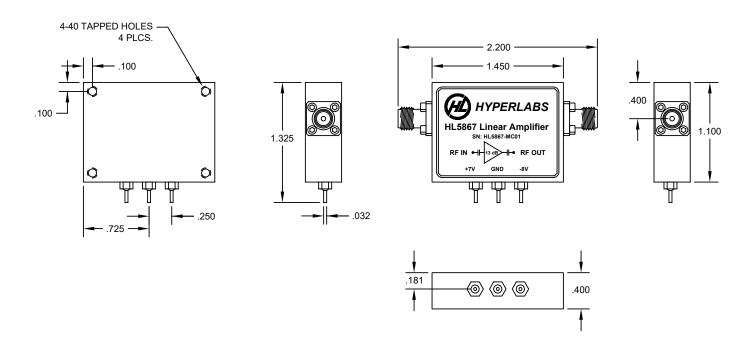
HL5867 mechnical drawing (opt. -29-JJ), inches
